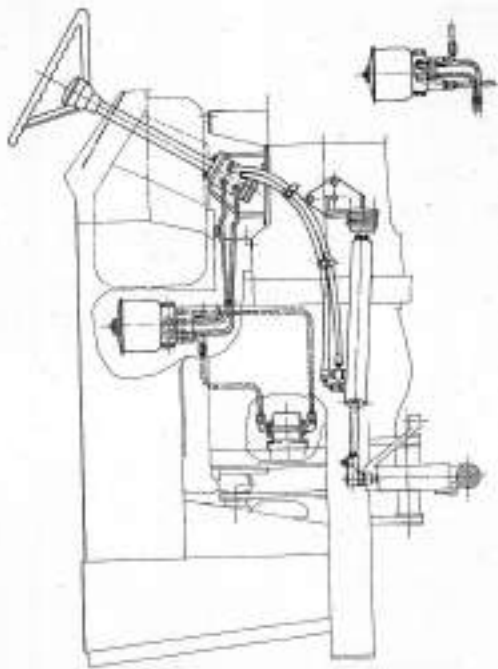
Hydraulic steering system arrangement - 00 1101010
